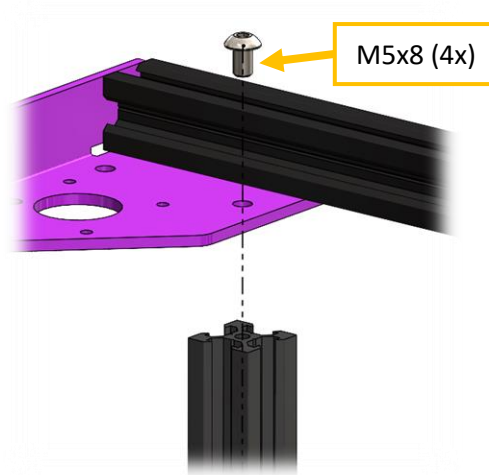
Back joint detail, M5x8 mm screw fixed to 2020 extrusion
